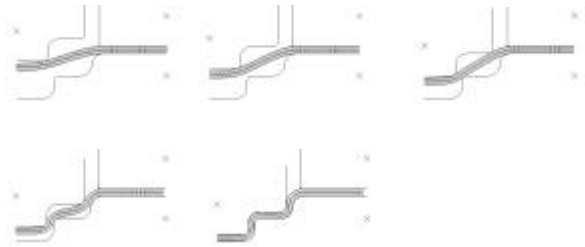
Deformation during Multi-Head Punch Deep Drawing
